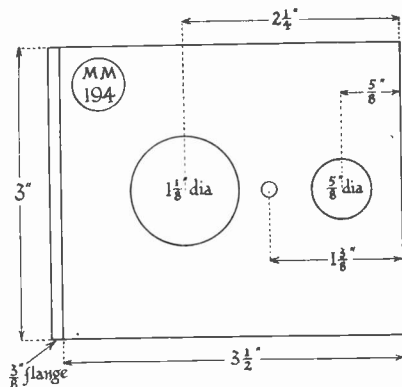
Sketch of mounting bracket for the Crystal Calibrator, showing important dimensions when fitted to an AR88. With suitable modifications to this mounting, the Calibrator could be fitted to almost any receiver in the communications category.
